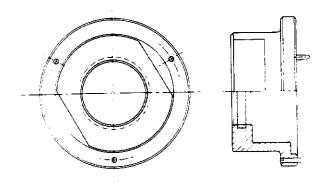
13228 TOOL-EXHAUST TUBE HOLDER
